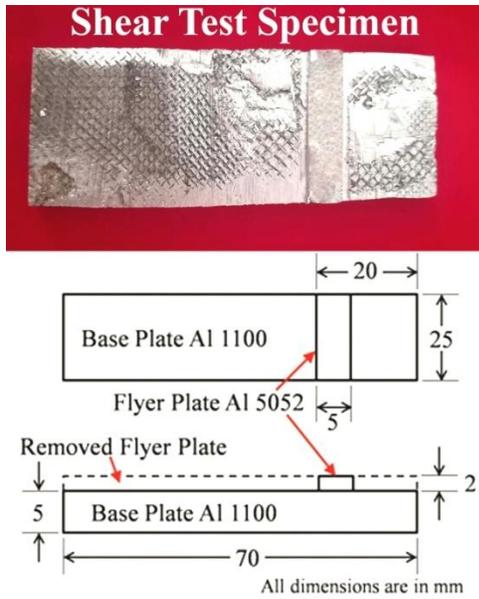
ASTM Side Shear Test Specimen with dimensions.
